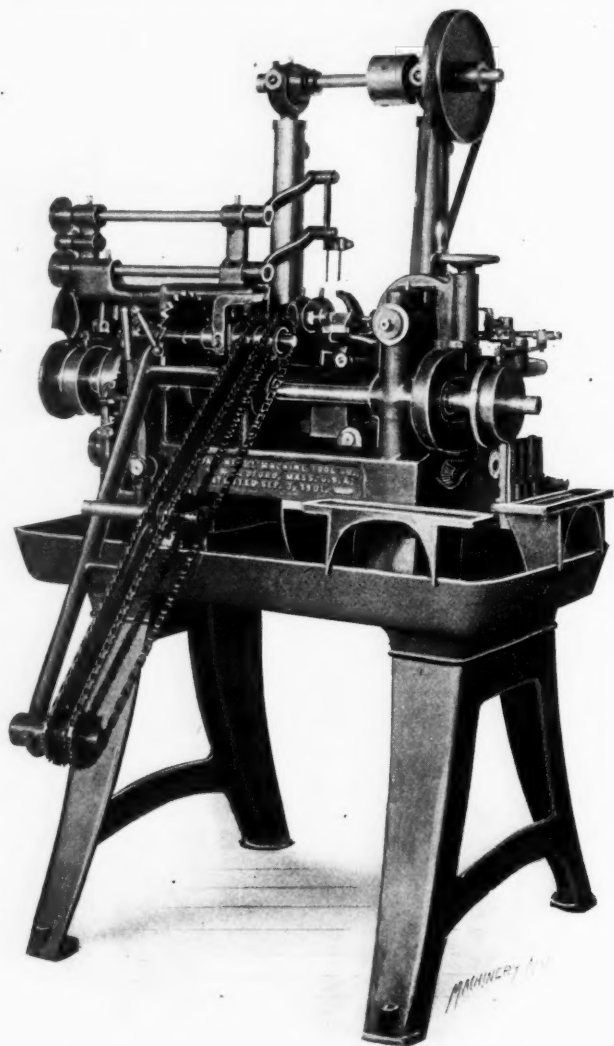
Automatic Machine for Drilling Needle Holes for Lantern Pinions
